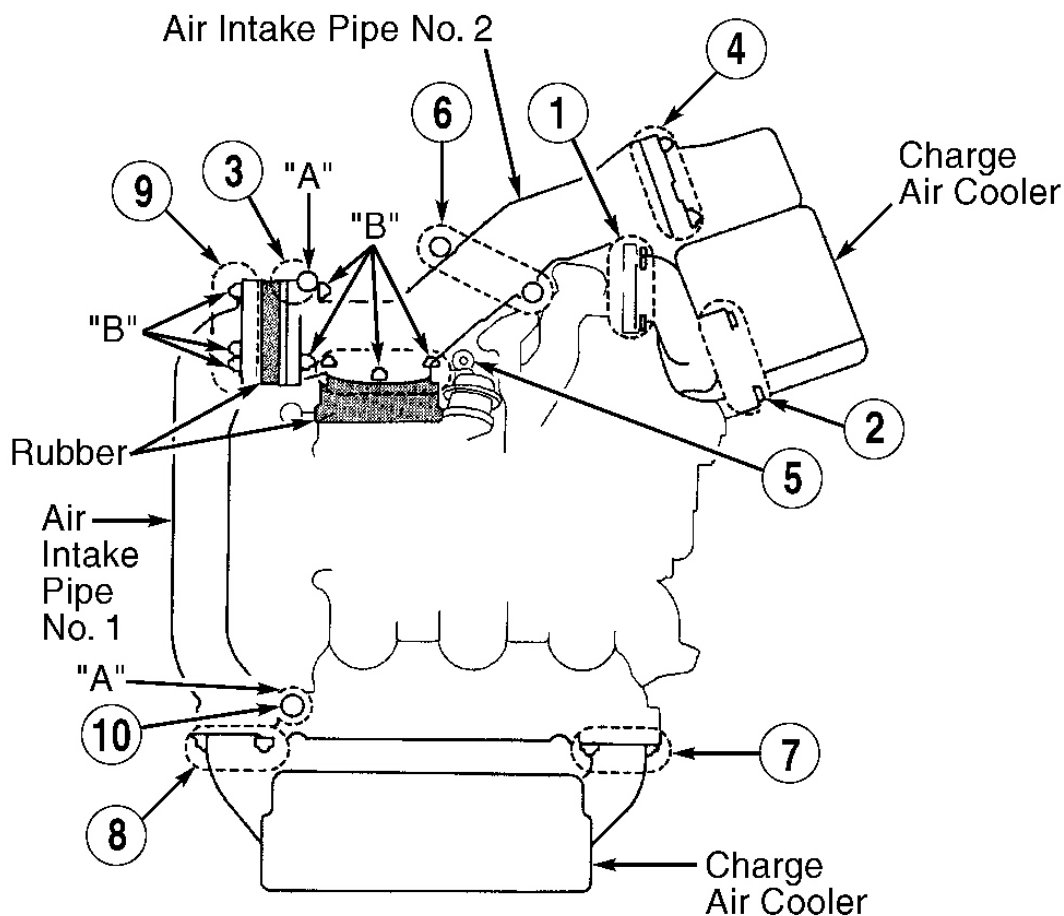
Installing Charge Air Cooler & Air Intake Pipe Assembly (View 1)
